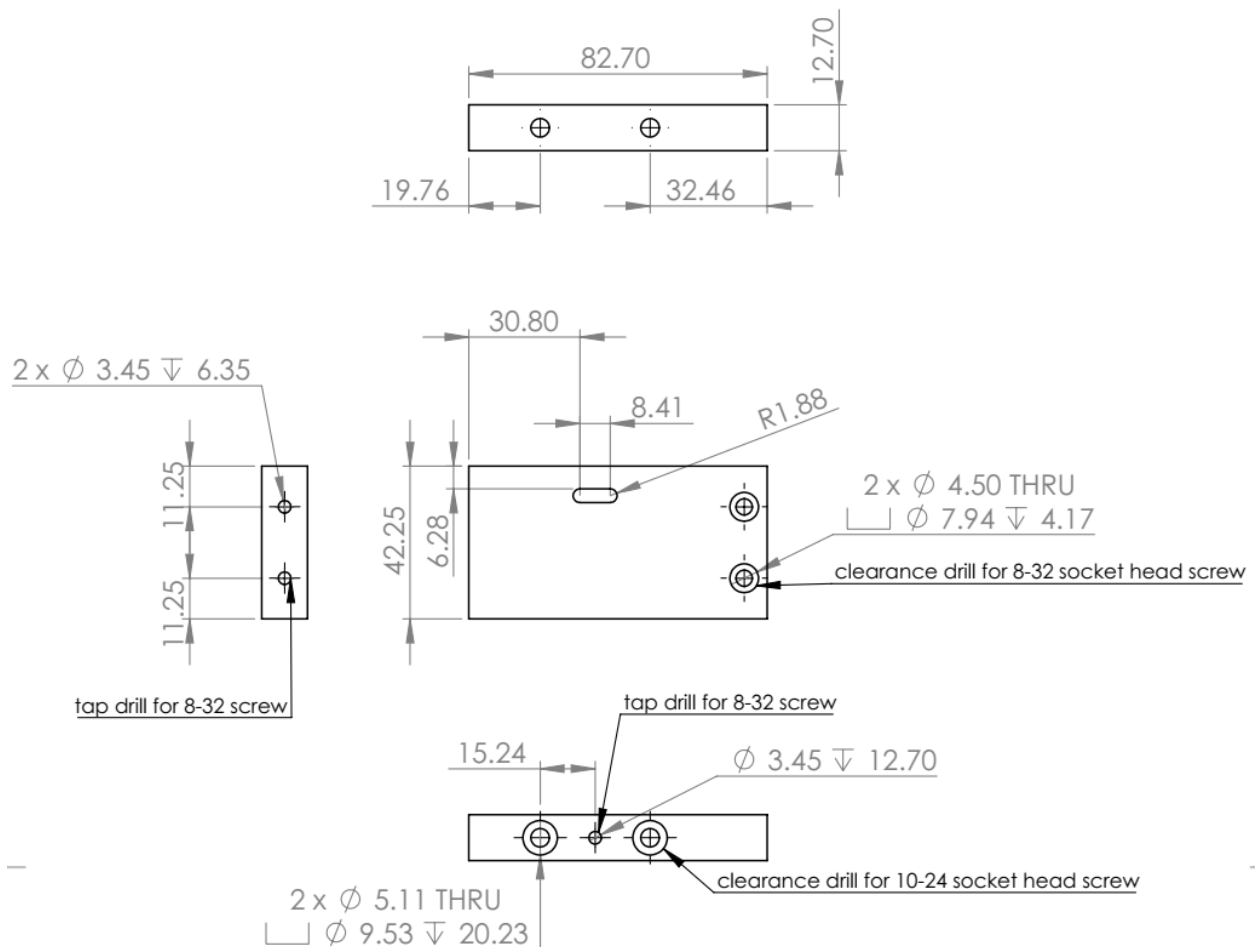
Technical drawings of the PEEK insulation used around the copper heater block. All dimensions are in millimeters.
